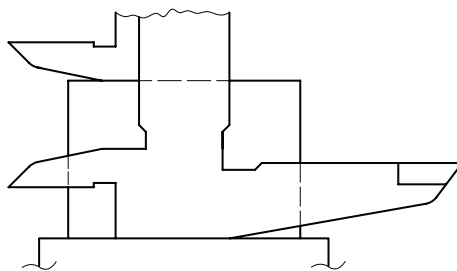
Example of test arrangement for shift error — Internal measurement of 5 mm diameter using the crossed knife-edge internal measuring faces
